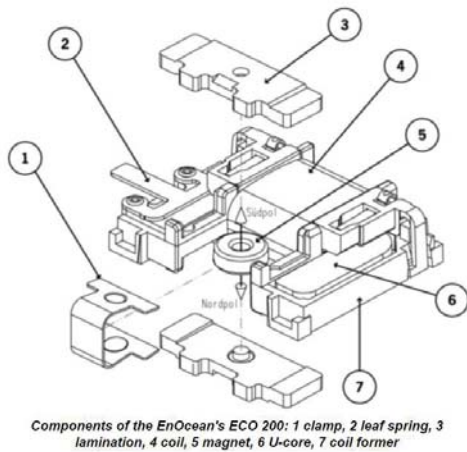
A drawing of the ECO 200, presented by Frank Schmidt [24].
